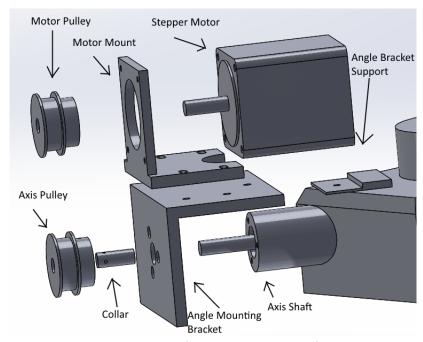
A labeled exploded diagram of all components of the z-axis design.
